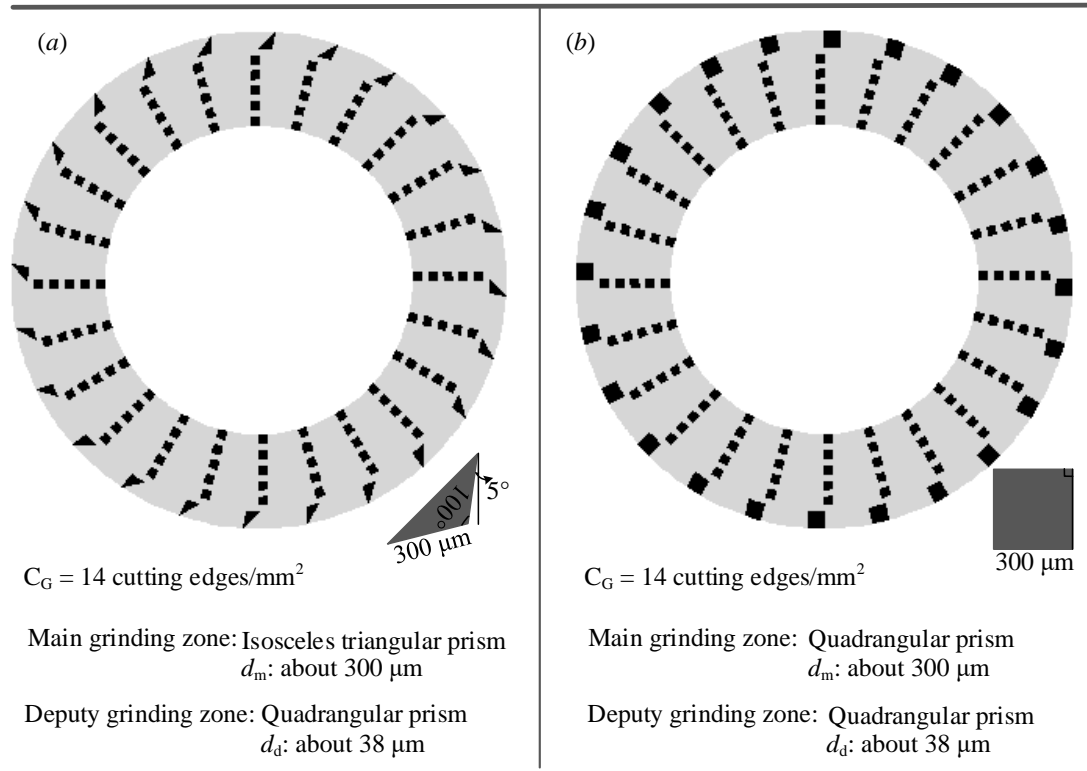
Design of binderless diamond grinding wheels (a) I and (b) II
